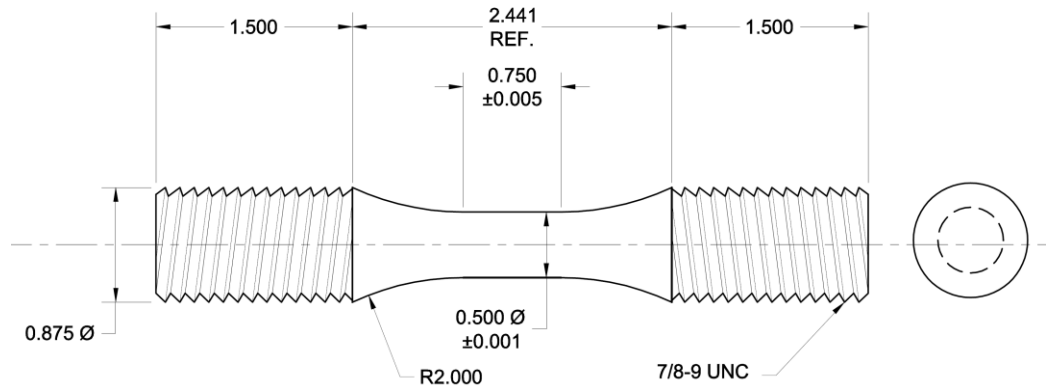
Cyclic test coupon dimensions (all dimensions in inches)
